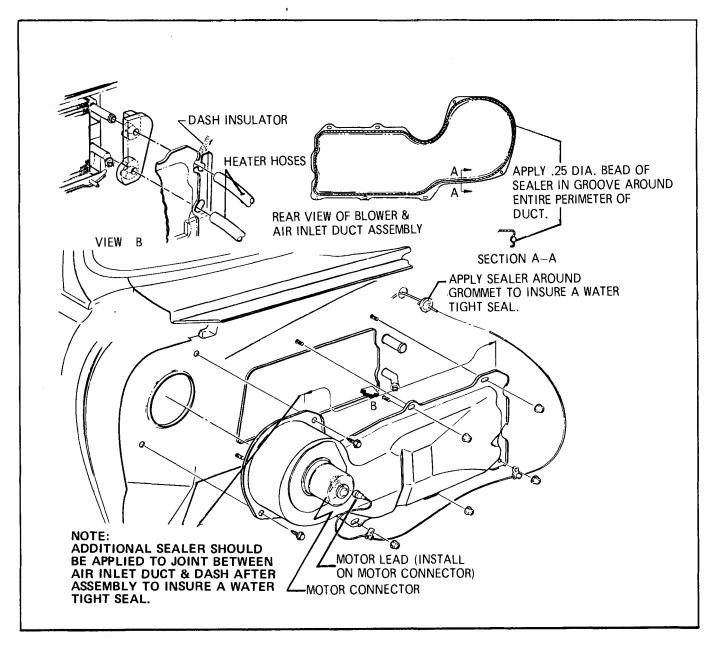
Blower Motor and Air Inlet Duct Installation - Except B Series
